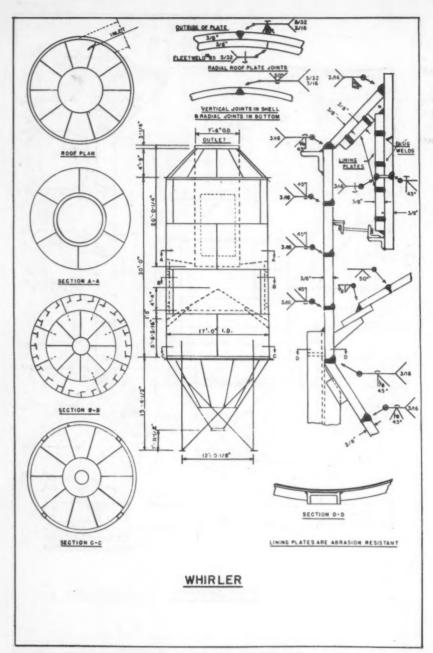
Details of the whirler. High carbon steel (0.45 per cent C) plate is welded to the outside surface of the uptake tube and to the underside of the cone roof to provide an abrasion resistant surface.
